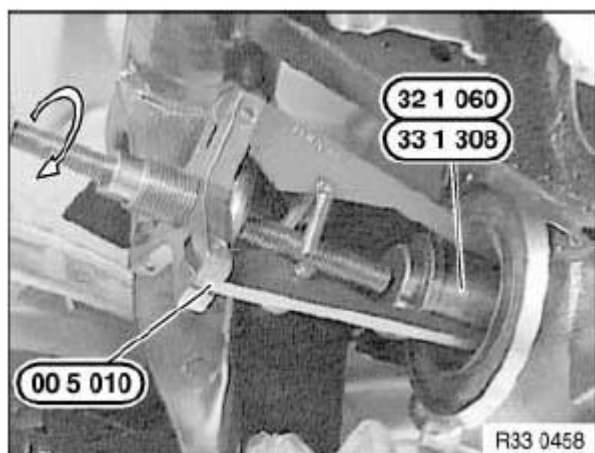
Identifying Special Tools (00 5 010 And 32 1 060 / 33 1 308) On Shaft Seal
